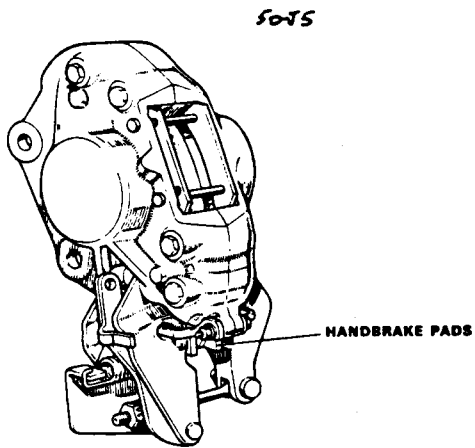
HANDBRAKE CALIPER COMPONENTS
